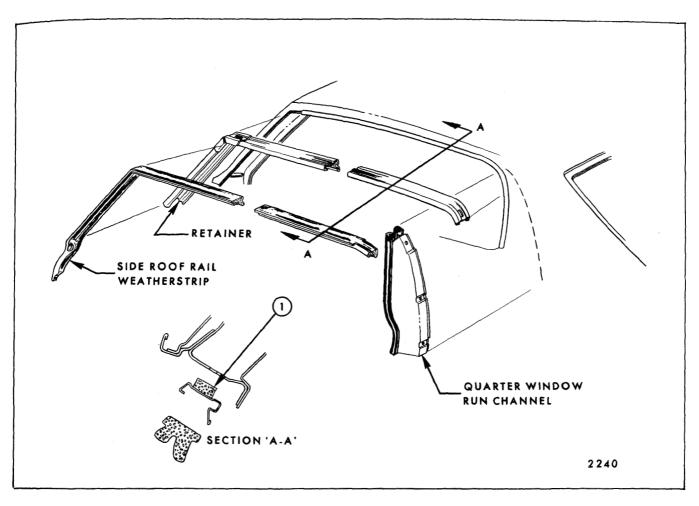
Side Roof Rail Weatherstrip and Retainer - "B-47" Styles
